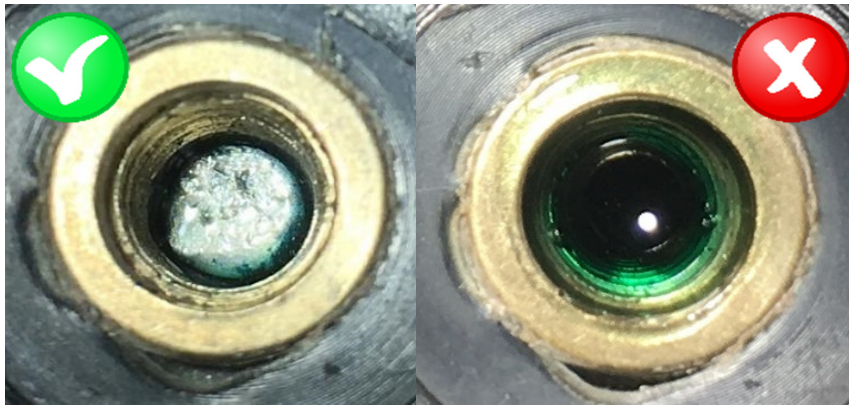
left photo: free of threadlocker / right photo: screw thread locker residue
